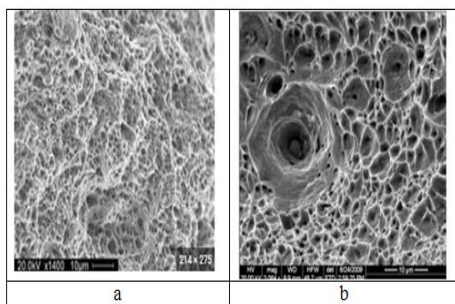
A magnified section: (a) ductile fracture, (b) brittle fracture.
